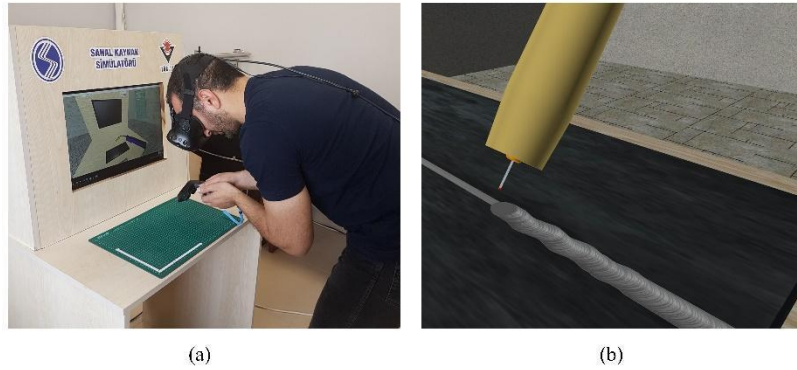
Welding with virtual welding simulator (a) Developed virtual welding simulator (b) Welding sample with virtual welding simulator
